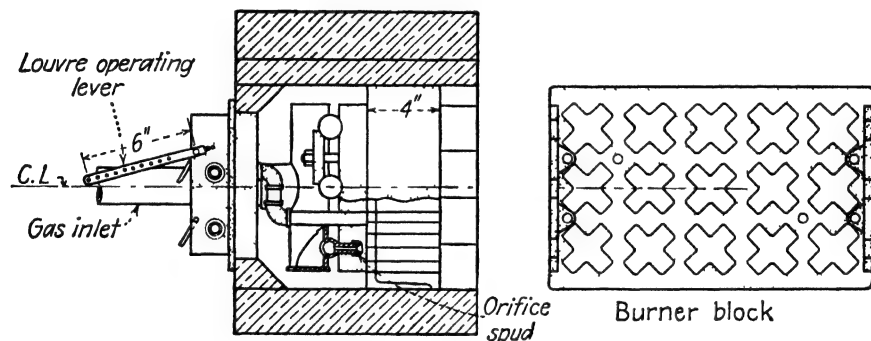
Tile-port burner for rectangular opening. (Courtesy of Webster Engineering Company.)
